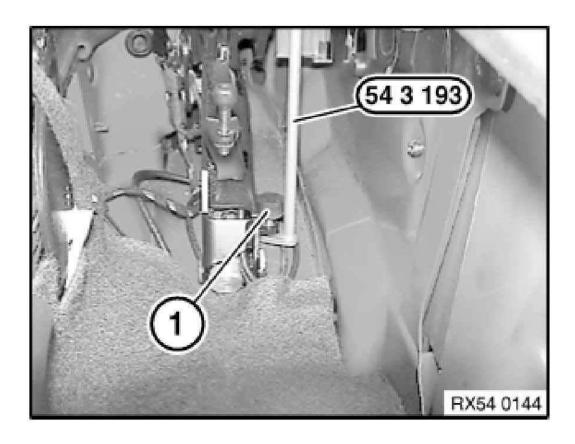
Twisting Stop Screw Out Of Main Bearing Courtesy of BMW OF NORTH AMERICA, INC.
